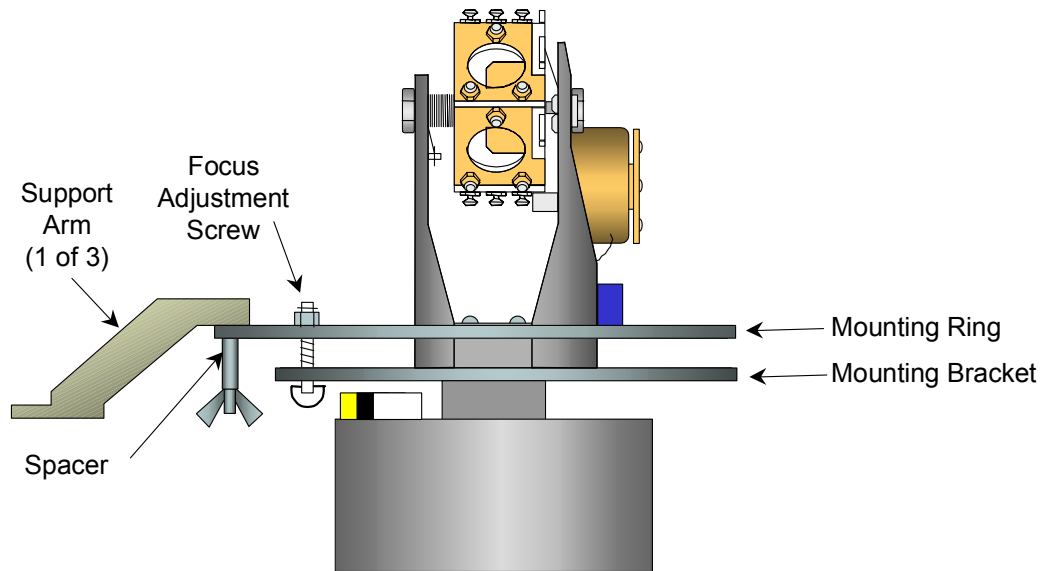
Mounting 12VDC Lampchanger/Flasher Assembly in 250mm Lantern.
